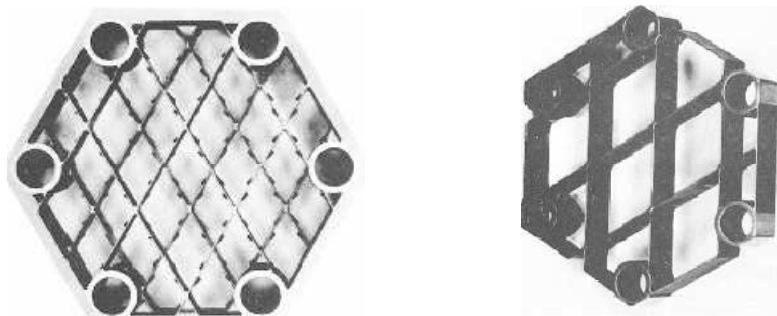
PROSPECT rhombic spacer: two superposed spacers (left) and isometric view of a single spacer (right)
